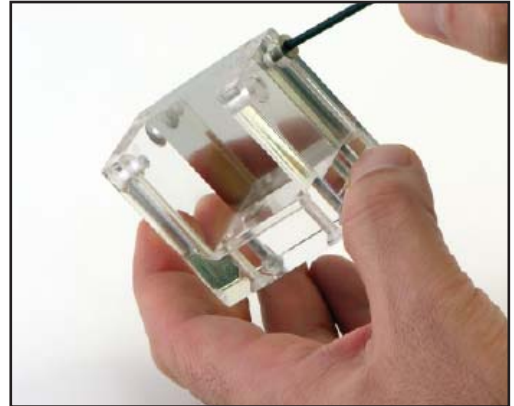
Fixture Disassembly - Removing the Flat Head, Socket Screws
